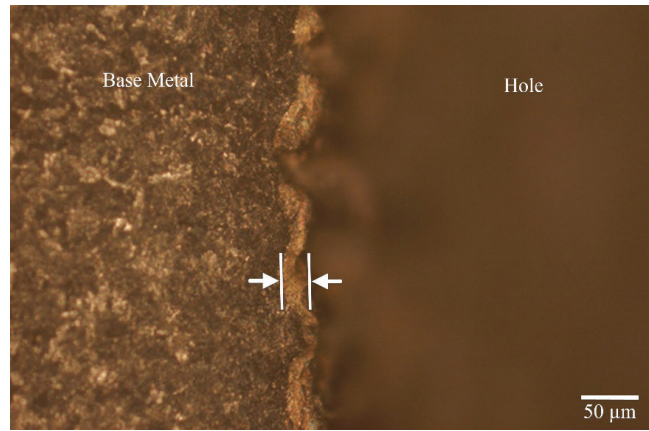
The recast layer seen on the drilled surface of AISI4140 with MC1 machining setting
